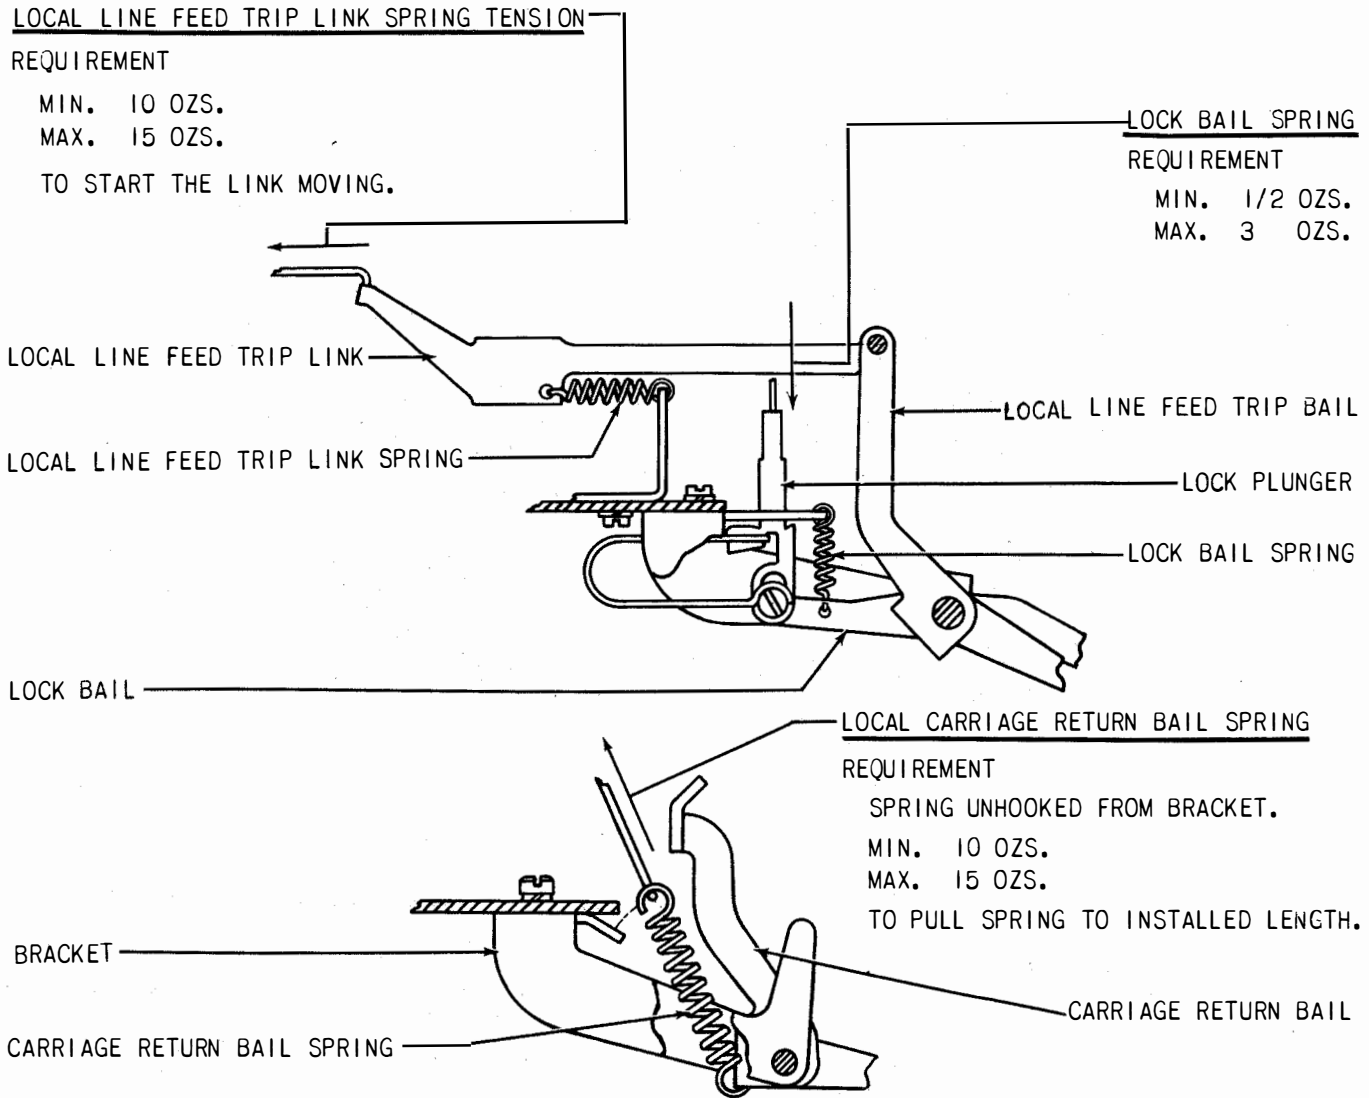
Keyboard Lock and Local Line Feed Mechanism
